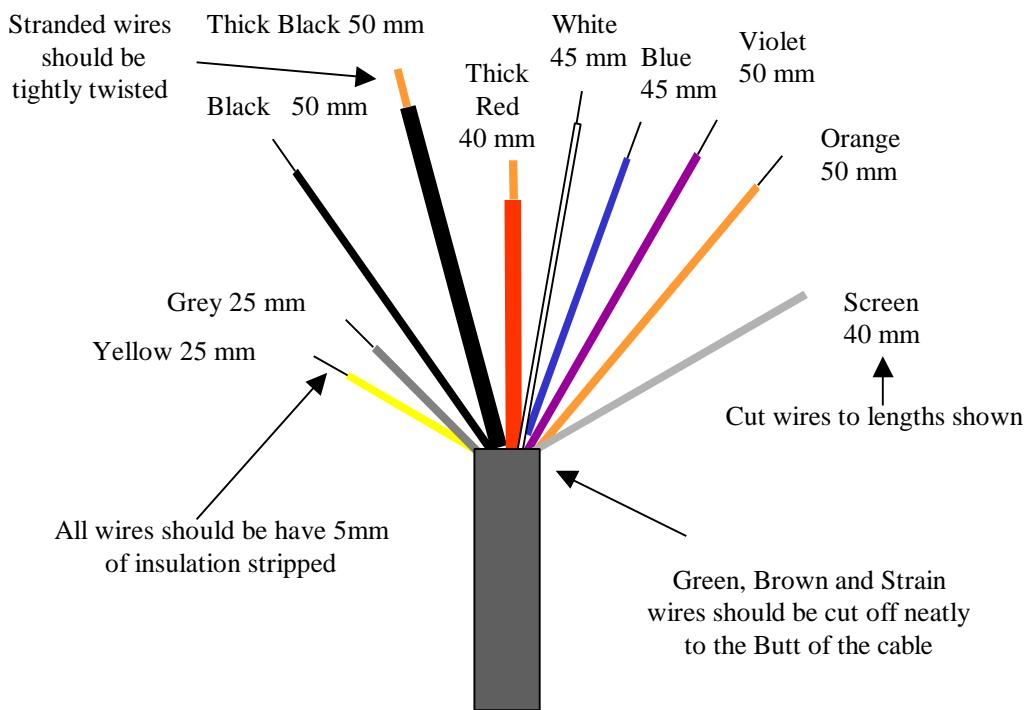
Wire Striping Dimensions for 80 Metre Drop Cable Lead-Out
